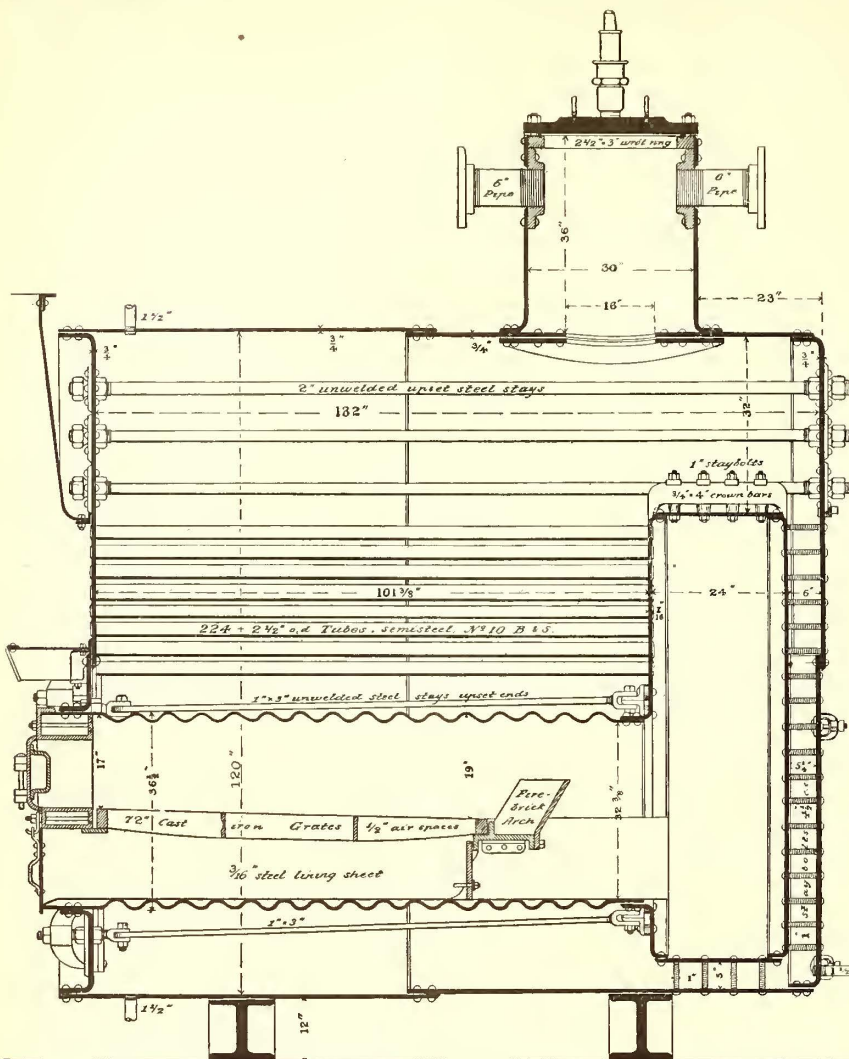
SECTION OF BOILER EMPLOYED AT TERMINAL STATION—SECOND AND THIRD AVENUE ELEVATED RAILWAYS, NEW YORK.
